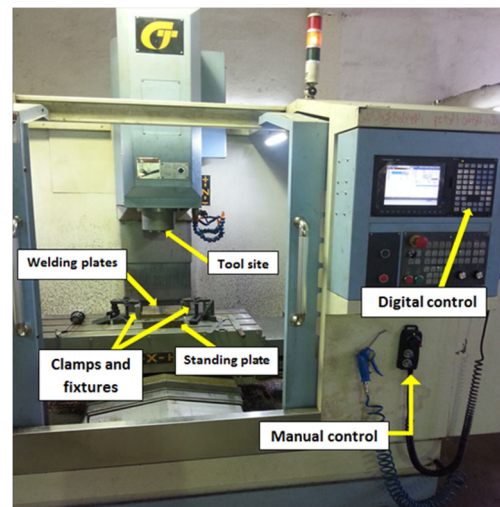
The processes of aluminium alloy by friction stir welding
